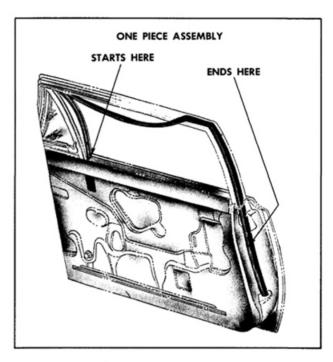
Front Door Glass Run Channel (Typical of all Closed Styles)
